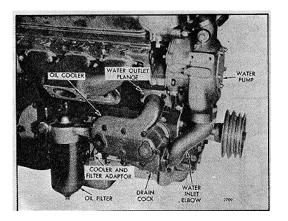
Typical Oil Cooler Mounting (6V or 8V Engine)
